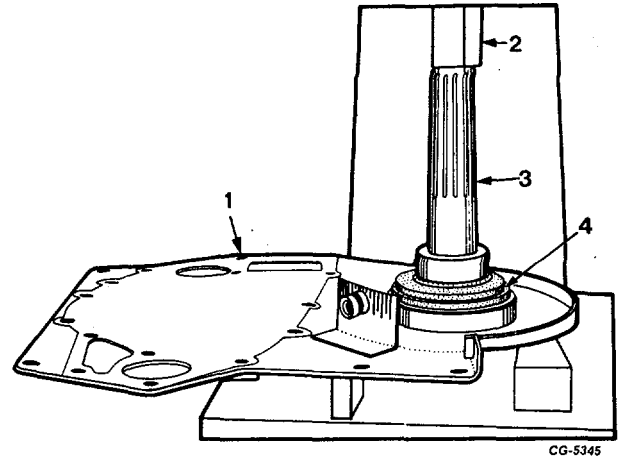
Front Cover Oil Seal Removal with Cover Removed Using SE-1905 Handle and 3-1/4" O.D. Disc
